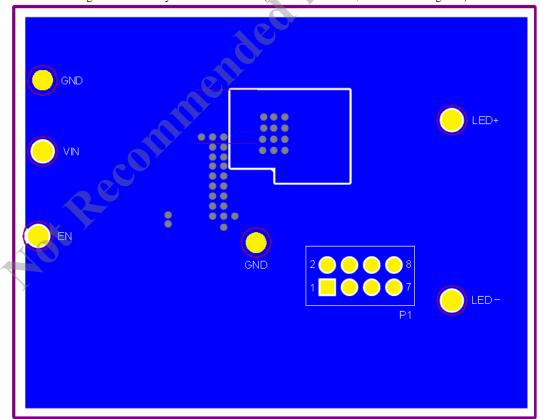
B Pattern layout of Demo-board(Double sided PCB / Back side)
